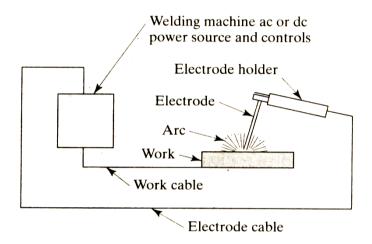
Schematic illustration of the shielded metal-arc welding operation (also known as stick welding, because the electrode is in the shape of a stick)
